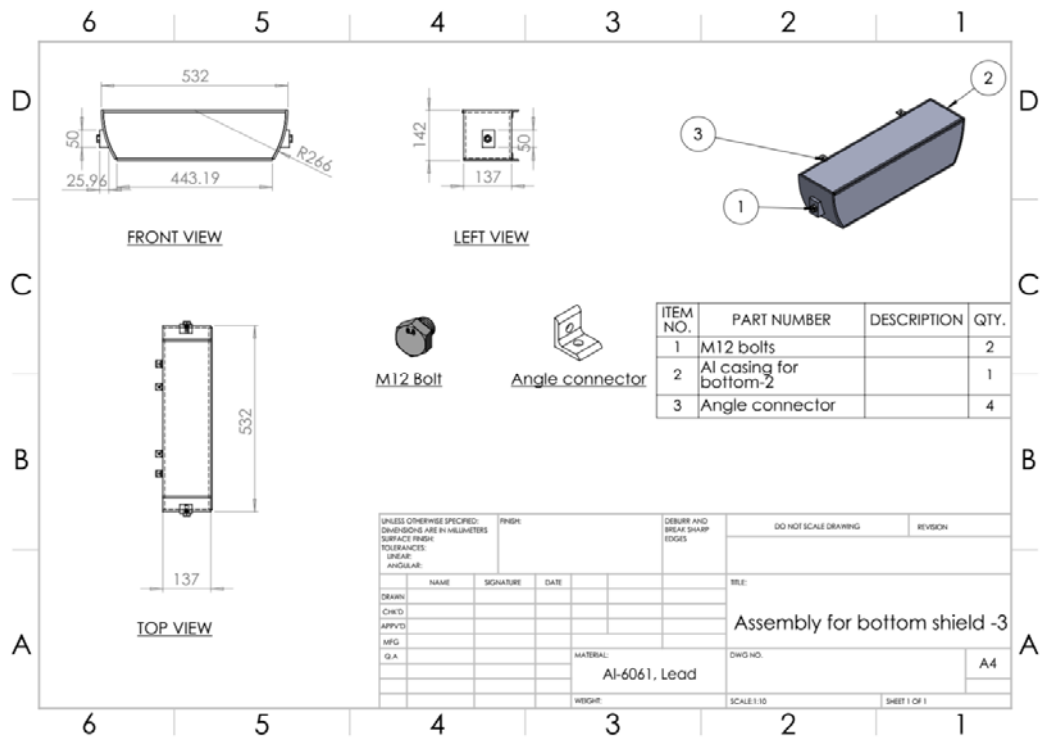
Design of Bottom Aluminum casing- 3. The casing is made of Al-6061 alloy and the inside will be filled with lead.
